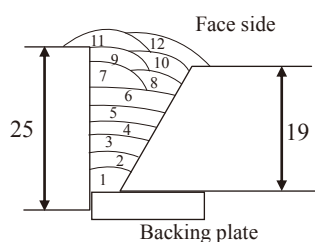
Welding pass sequence of the beam-to-column joint
